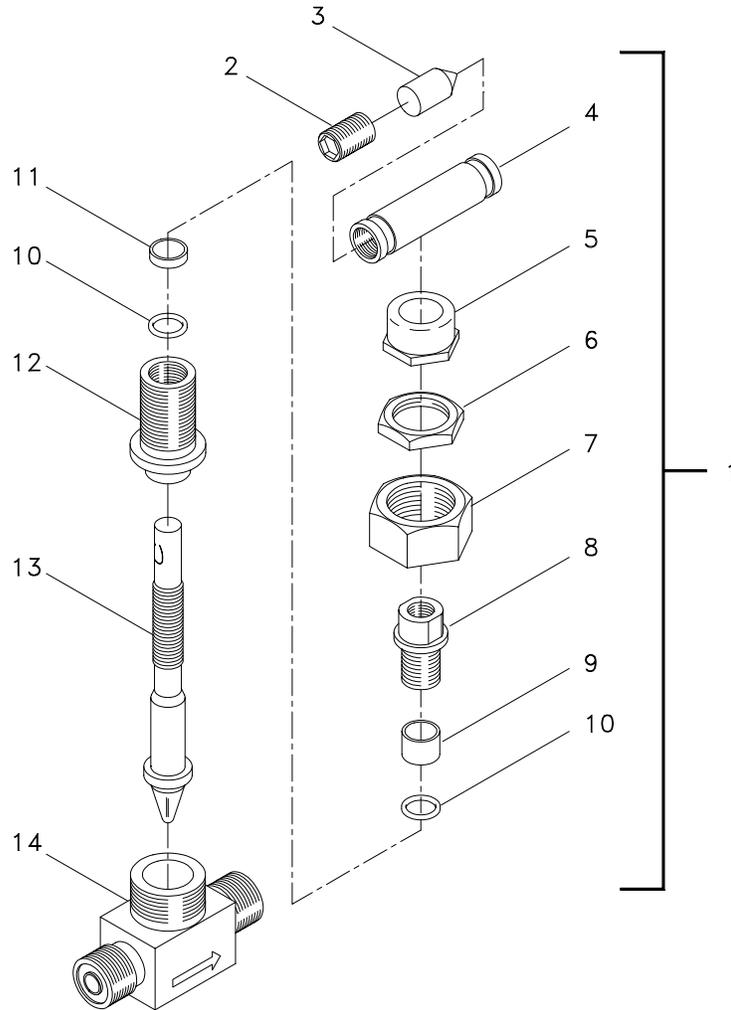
Check Valves (ALP-V206, ALP-V303)
